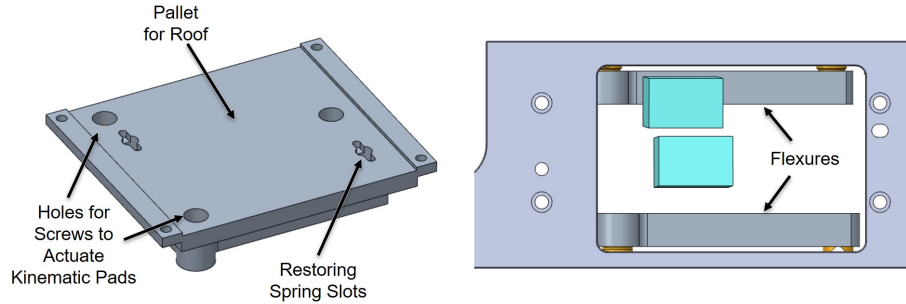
Pallet Assembly (Left) and Flexure Implementation in the Housing (Right)
